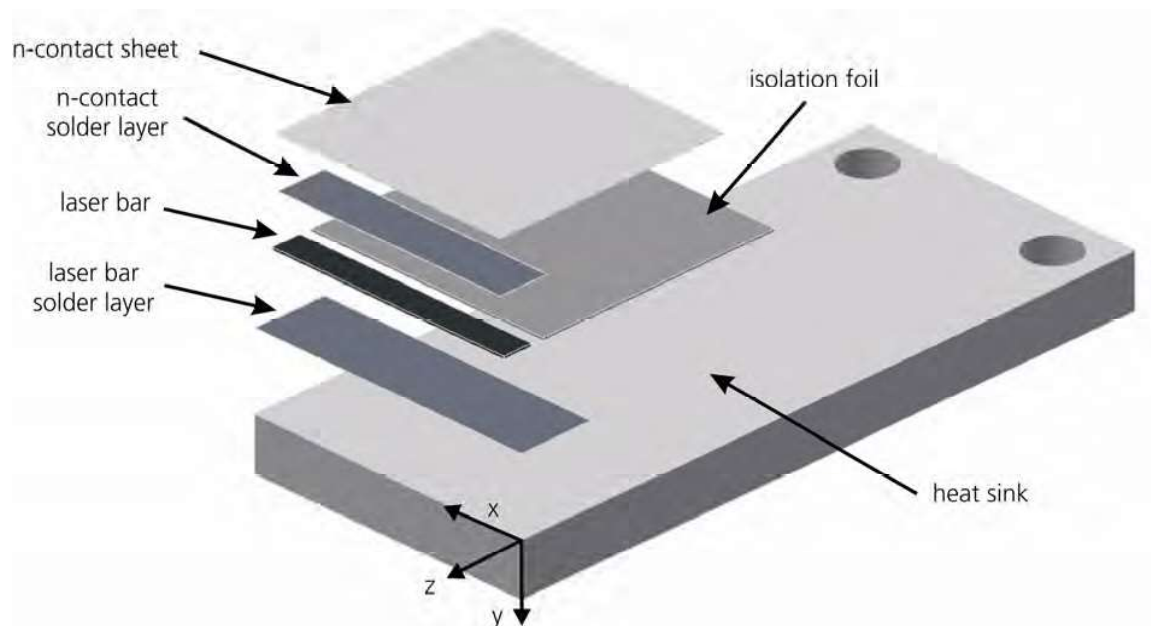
Assembly of diode laser. The laser bar is mounted onto the heat sink using a laser bar solder and the n-contact sheet with the n-contact solder. An isolation foil isolates the n-contact from the p-contact (heat sink).
